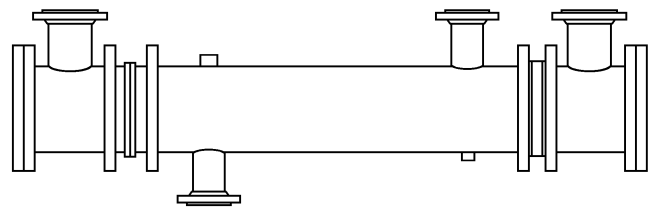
Straight-Tube Floating Tubesheet Shell-and-Tube Heat Exchanger with Removable Bundle Assembly and Fabricated Channel Heads
